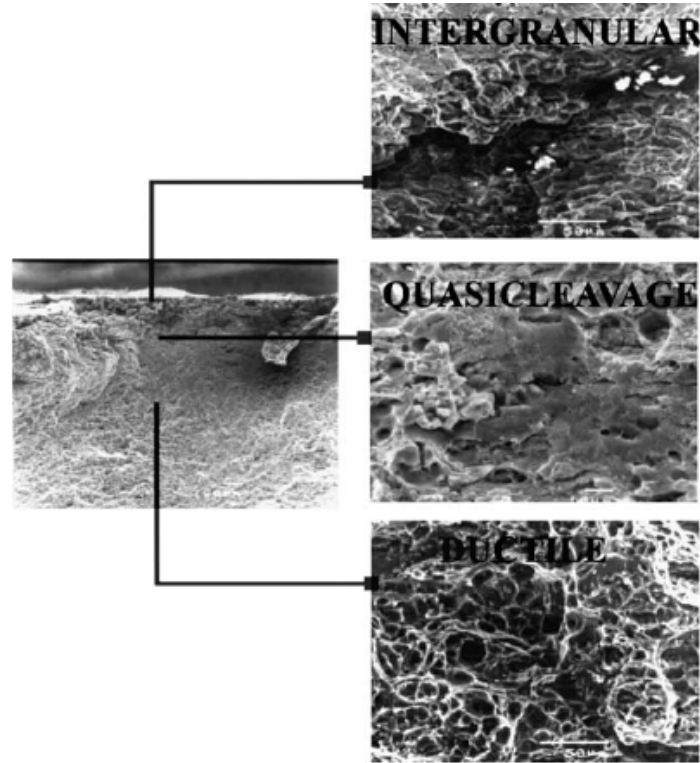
Fracture Surfaces of Corrosion-induced Hydrogen Embrittlement in Aluminium Alloy 2024 (Kamoutsi, H., 2006).
